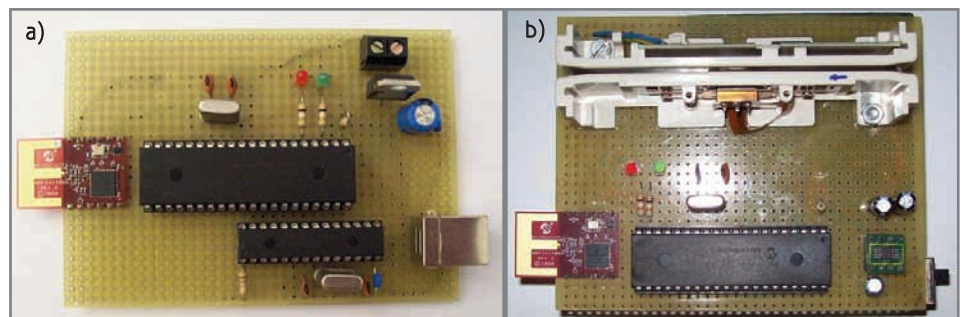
The final wireless card reader prototype. a—The RF module with the PCB antenna is on the left. b—The magnetic swipe card reader is at the top.
